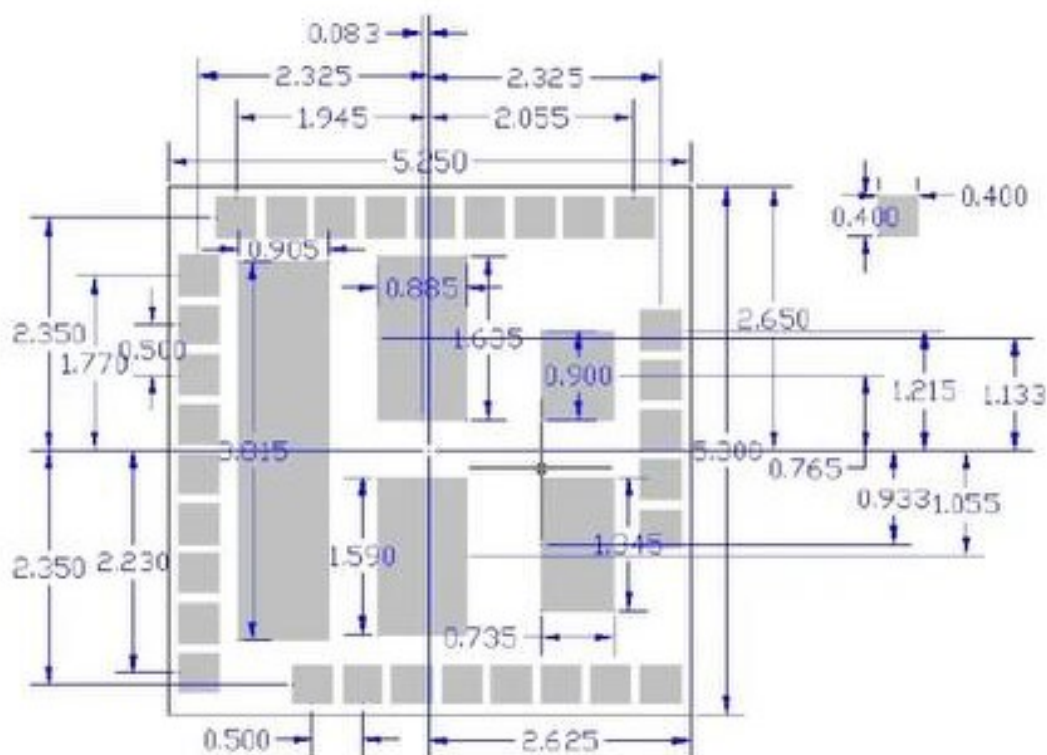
HS8298H PCB Solder Mask Pattern (Top View)
